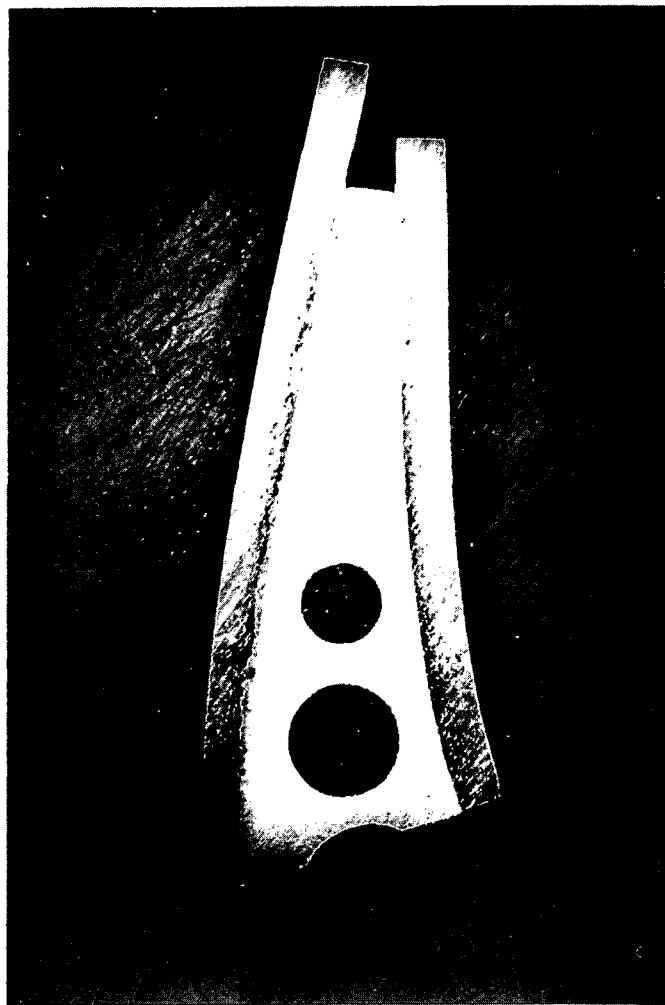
Suction Face of Activated Diffusion Brazed Blade. Note that Smoke is Being Emitted Out of the Bleed Holes.
